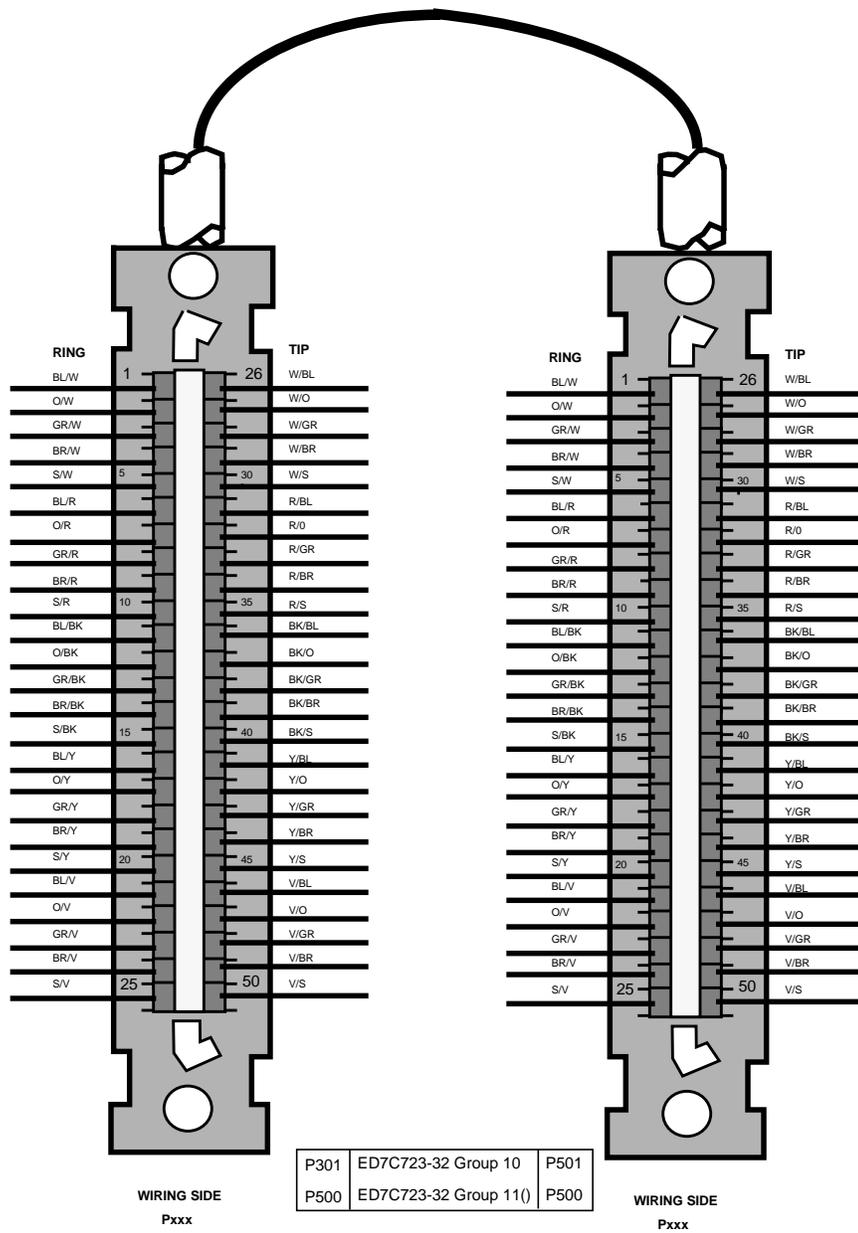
Cable Assembly ED7C723-32 Groups 10 and 110
